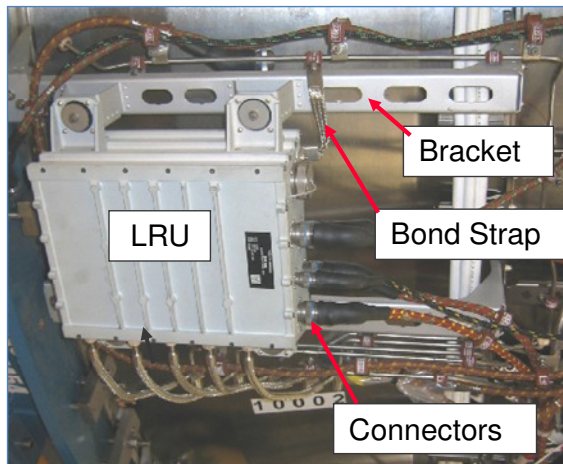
Typical LRU installation with connectors, wiring and grounding
